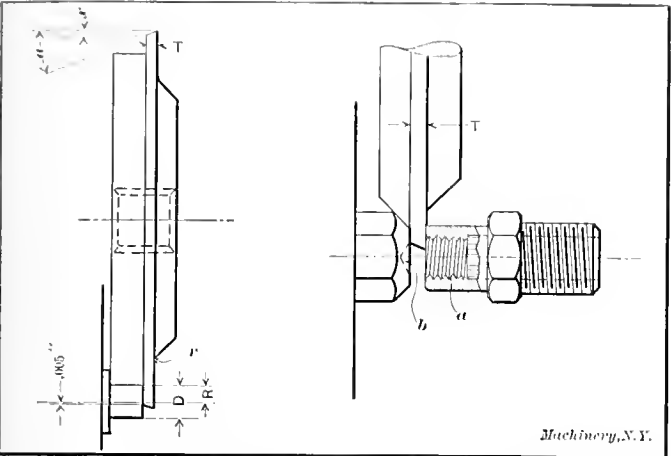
Diagram showing Dimensions of Circular Cut-off Tool when it is used both for cutting off and forming part of the Work
